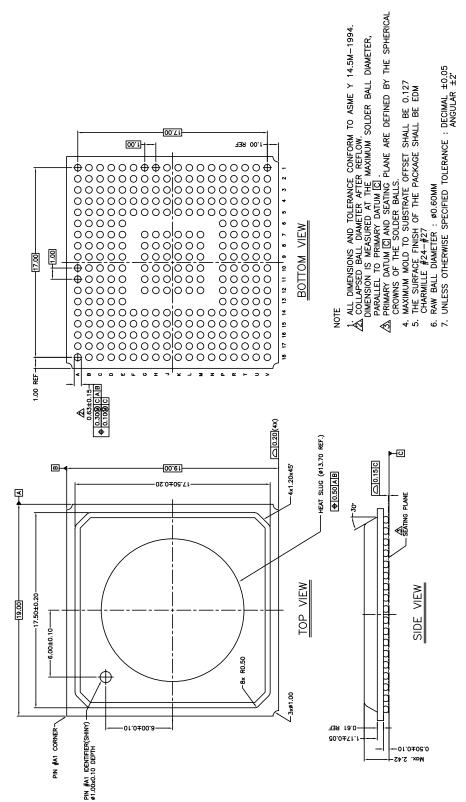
PEX 8508 296-Ball PBGA-H Mechanical Dimensions
